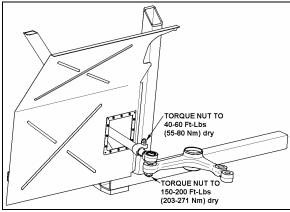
DRAG LINK TO BELL CRANK CONNECTION
